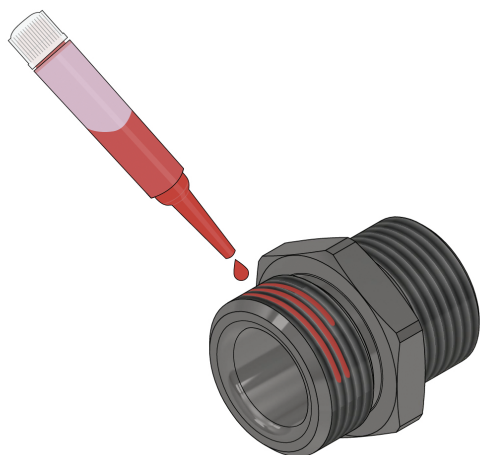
Apply Thread Locker to the Short End of the Filter Screw
